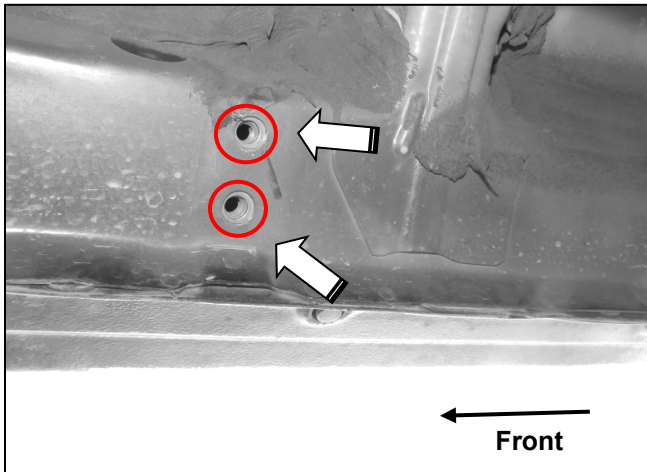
Attach Passenger/Right Front Mounting Bracket to Front threaded inserts until hand tight
